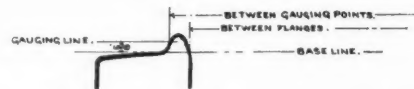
Measurements for Mounted Wheels Loose or Out of Gauge.
